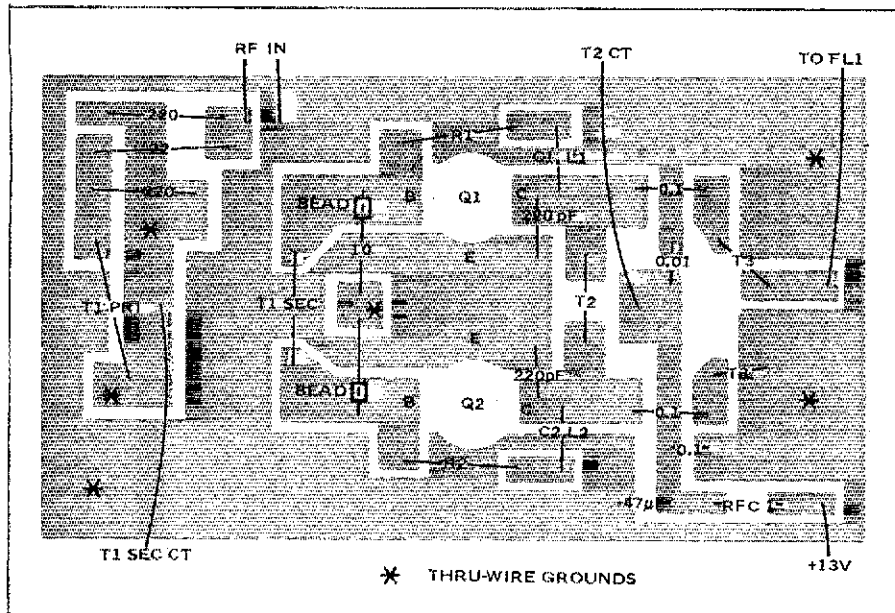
Parts placement guide for the amplifier board. Parts are mounted on the etched side of the double-sided pc board; the shaded area in this view represents the copper pattern. The other side of the board is unetched. (The etching pattern appears in the "Hints and Kinks" section of this issue.) Decimal-value numbers alone represent capacitance in microfarads. Whole-number values without units represent resistance in ohms. Note that ferrite beads are slipped over one end of each of the two 10-ohm resistors.
